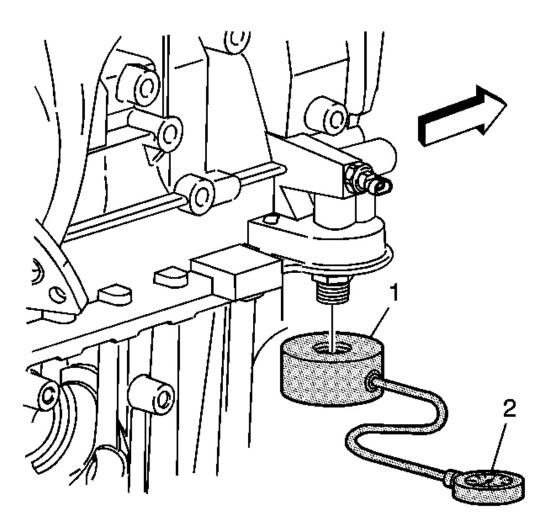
Measuring Oil Pressure Using J 42907 Courtesy of GENERAL MOTORS CORP.
